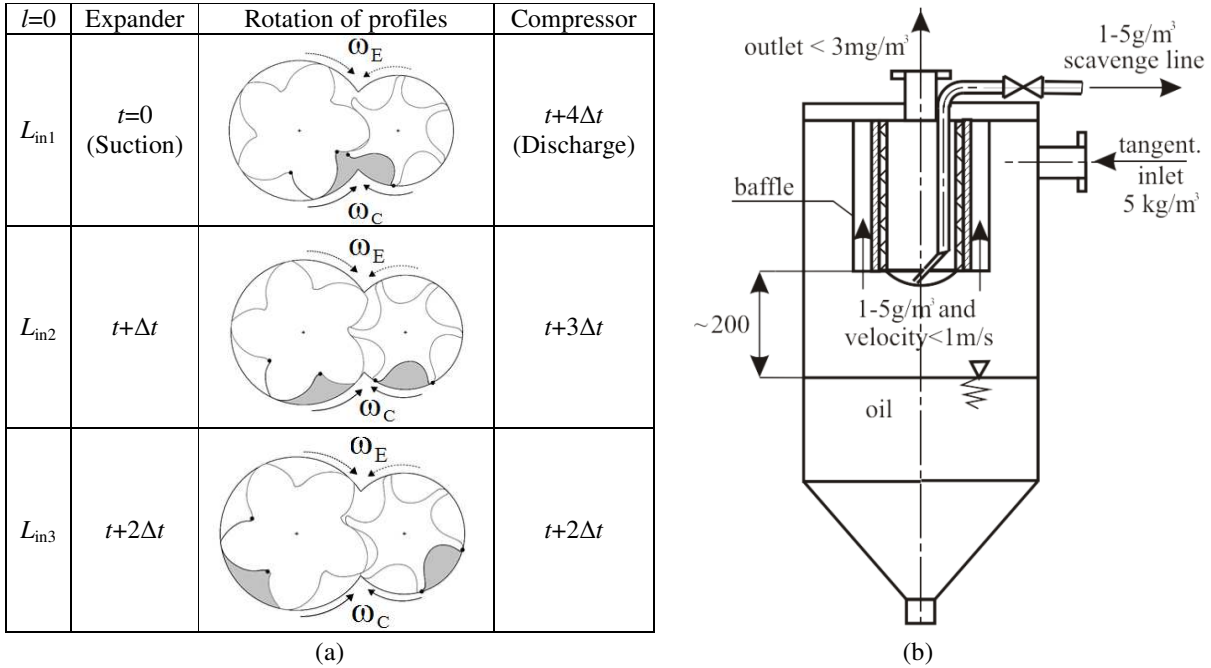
(a) Rolling of rotors in the compressor front plane or in a series of cuts along the machine axis, (b) Cyclone for spinning oil droplets, including internal cleaning line.
